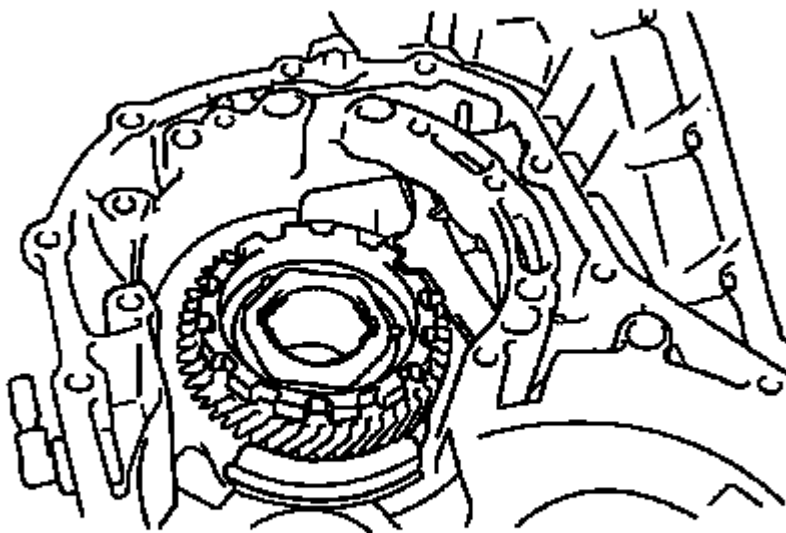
Counter Drive Gear & Parking Lock Pawl
